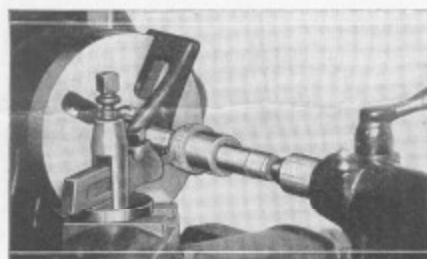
Cutting a Screw Thread on a Replacement Water Pump Bushing.
